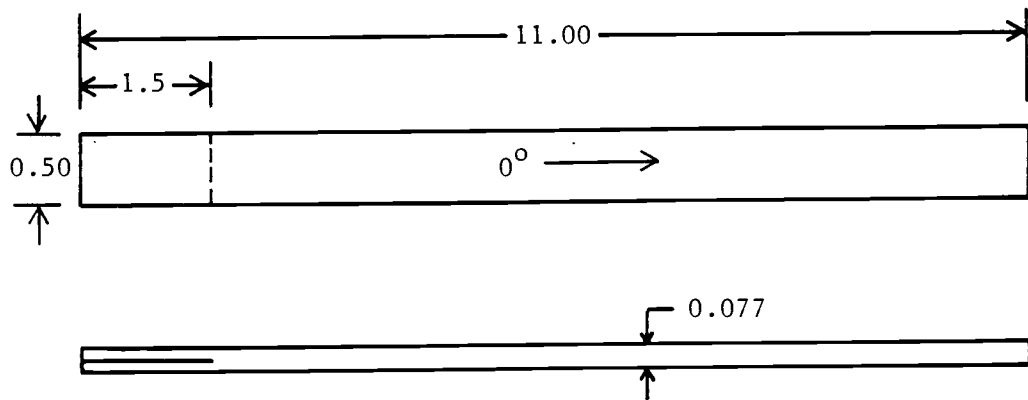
Specimen geometry for mode I DCB tests showing location of teflon insert. All dimensions are in inches.
